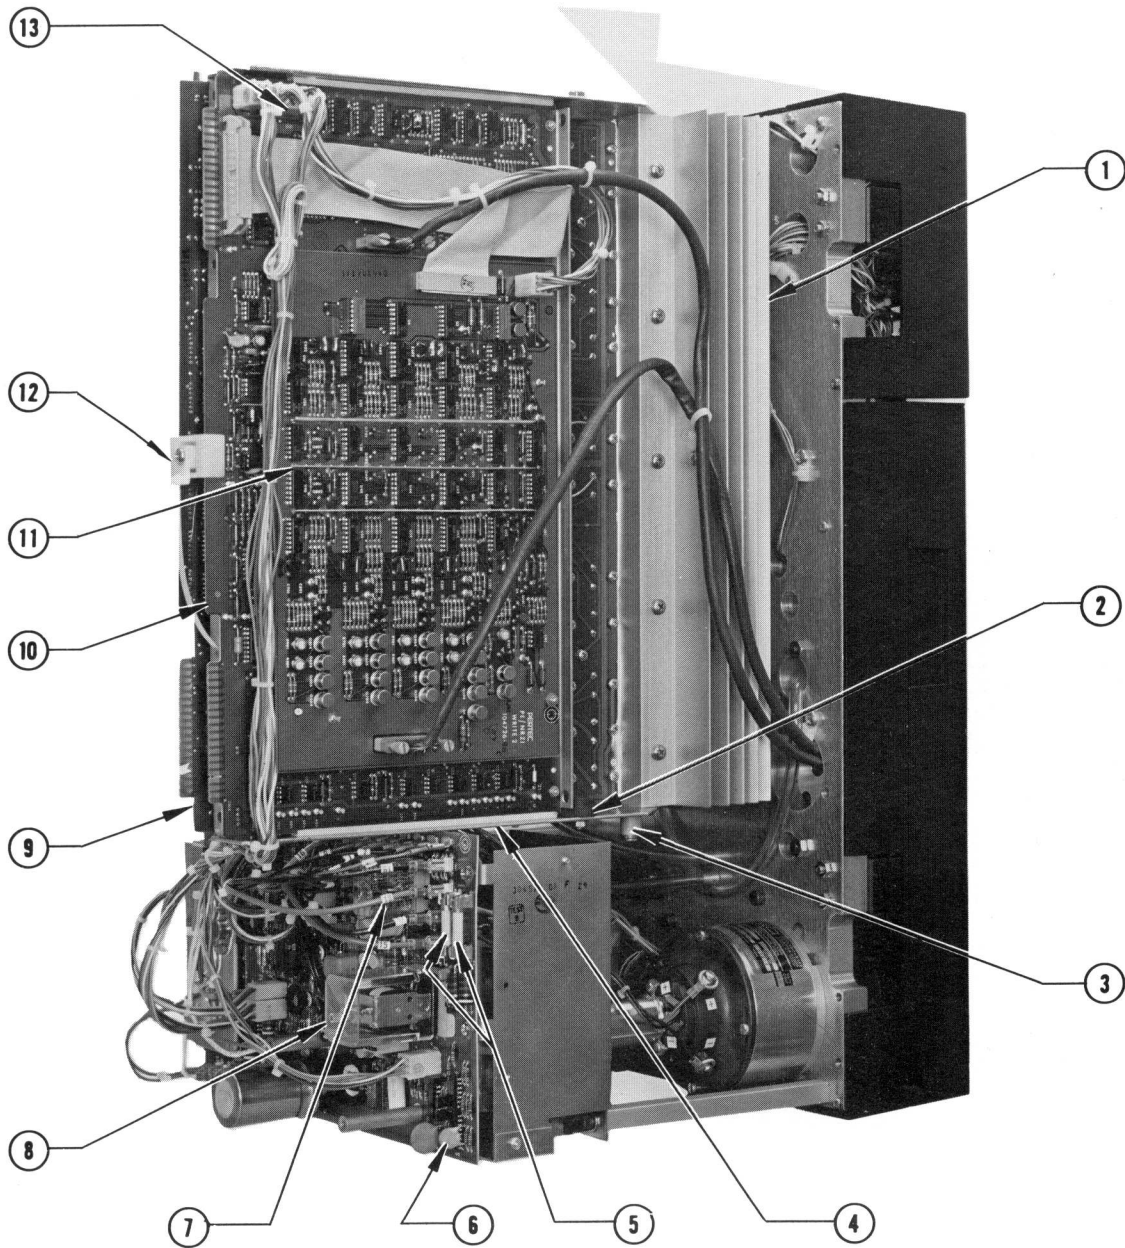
TU45 Transport Photo Parts Index, Rear View
